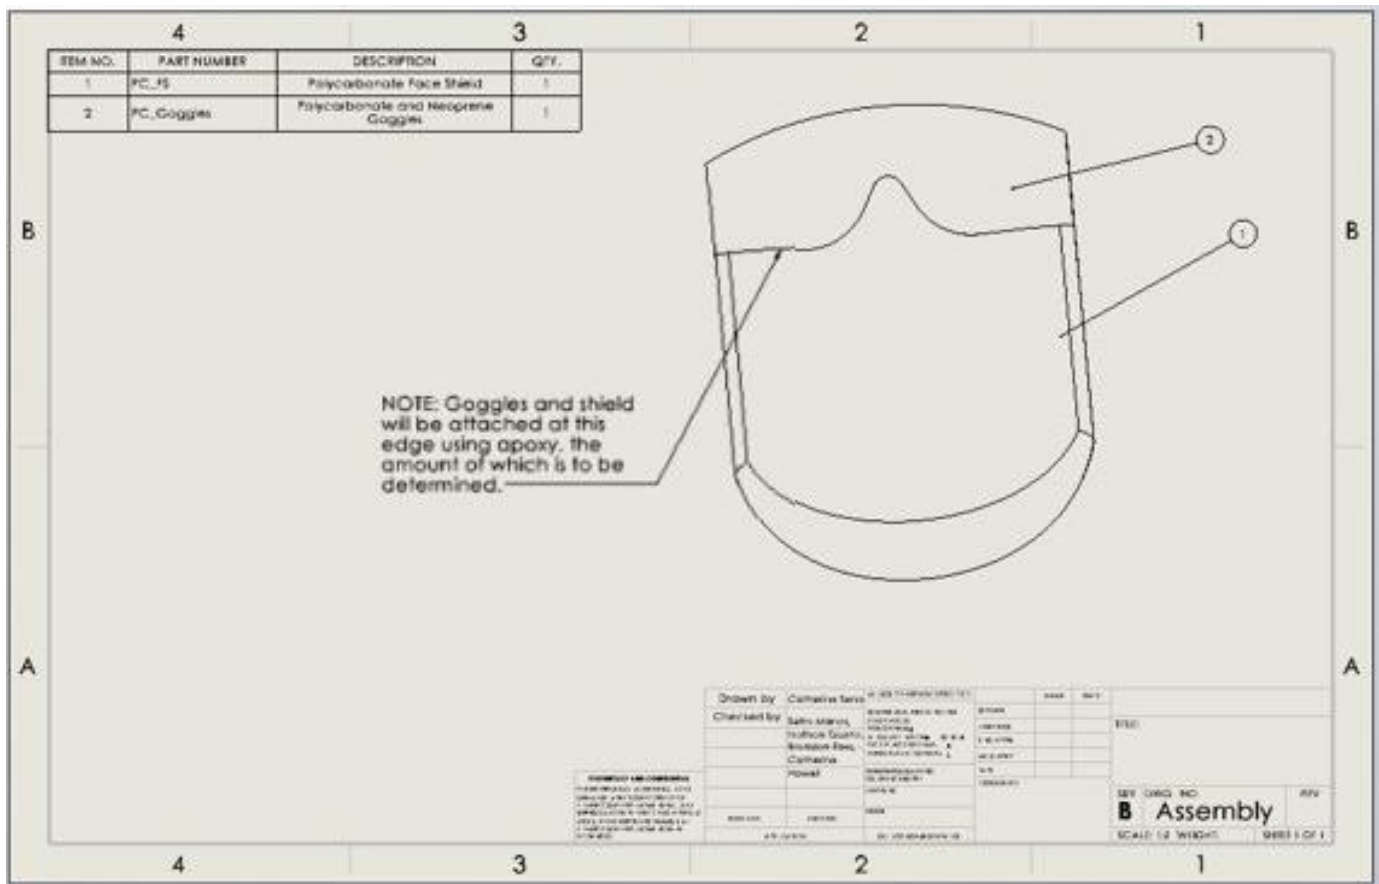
Assembly drawing of the face shield attached to the chosen goggles
